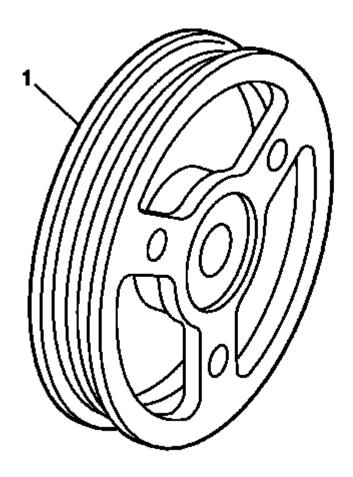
Crankshaft Balancer Courtesy of GENERAL MOTORS COMPANY
